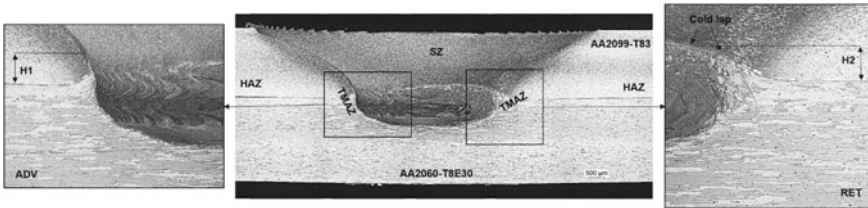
Cross-section of FSW lap joint produced at 800 rpm and 250 mm/min by a tool with three flats
